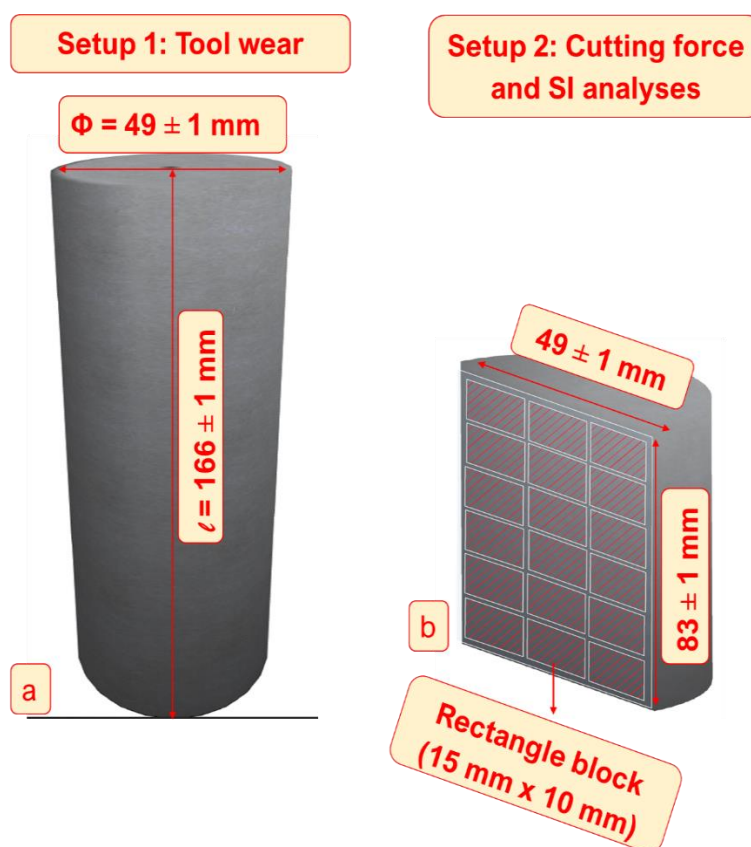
Dimensions of (a) *Setup 1* for tool wear measurement (b) *Setup 2* for cutting forces and SI analysis
